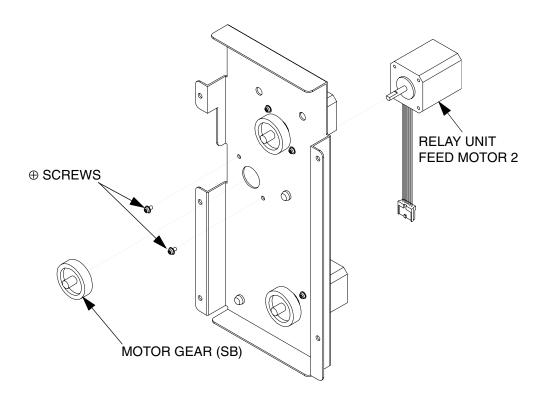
Removal of the Relay Unit Feed Motor 2
